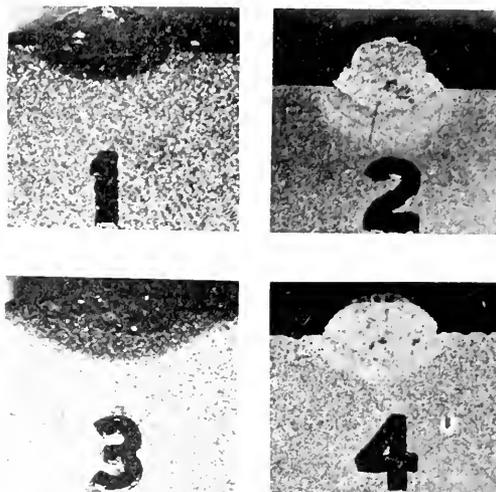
Illustration showing Depth of Heat Penetration and Weld Penetration with Long and Short Arcs
